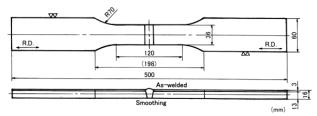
Shape of fatigue test specimen (butt-welded joint of clad steel plate)
